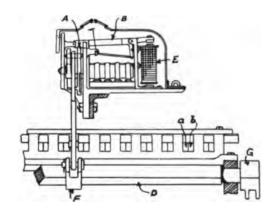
Sectional View of Electric Lock, Fig. 2330, Showing Alternative Method of Attaching to Saxby & Farmer Interlocking Machine.
